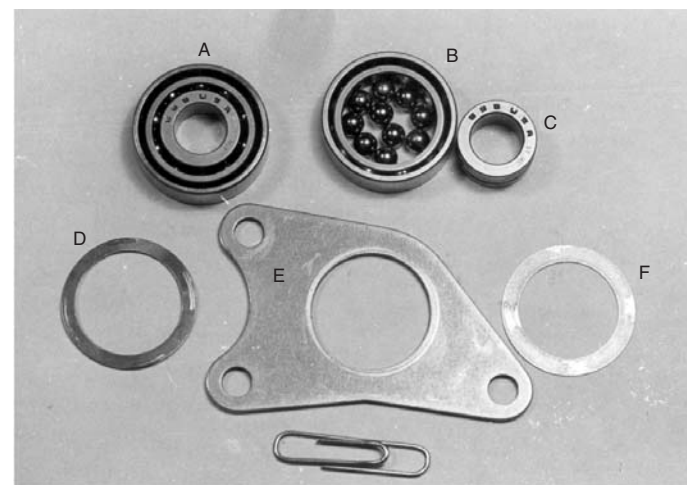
shows the torque sensor assembly. The assembly was disassembled. The disassembled components are also shown in this figure. It was found that the two matched bearings had been assembled properly. However, of the two bearings, the inner one (the bearing away from the retaining plate) showed evidence of excessive friction compared with the other bearing.
